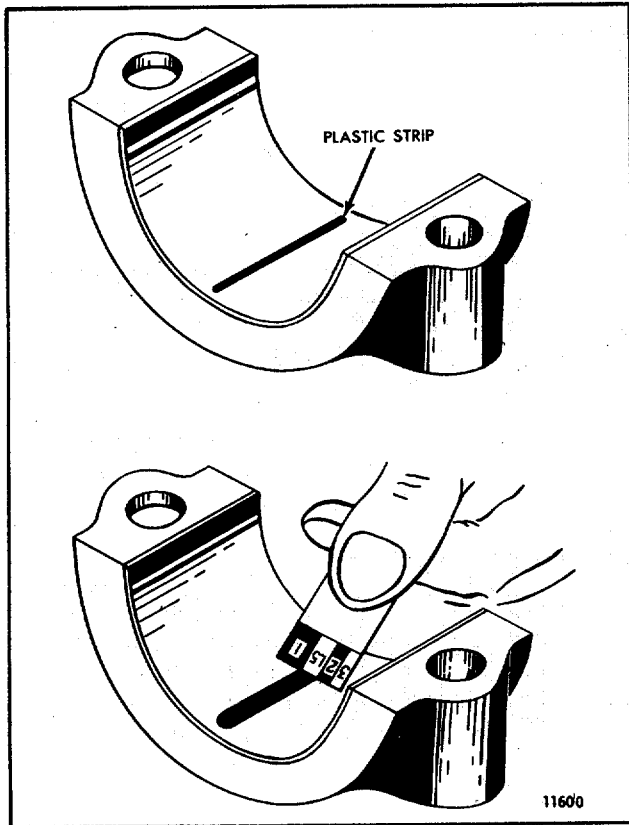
Using Plastic Strip to Measure Bearing-to-Crankshaft Clearance
